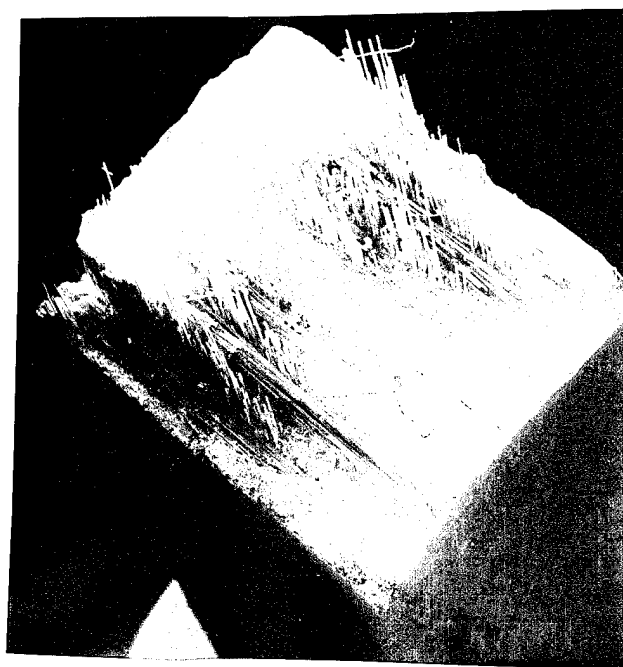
In-Phase TMF: 120 MPa Fracture Surface, 12x
